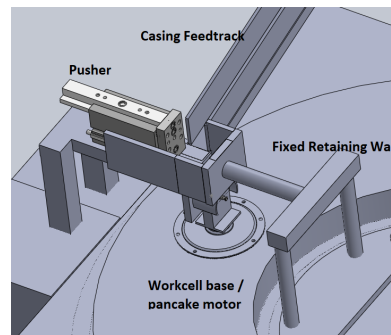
Image of the CAD for the caster, work cell and pancake motor.
